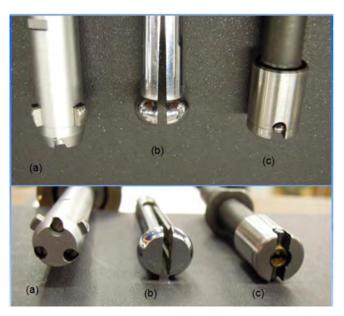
Hole probe types for 11.11 mm. (a) 3-point (b) split ball (c) 2-point ball plug.
